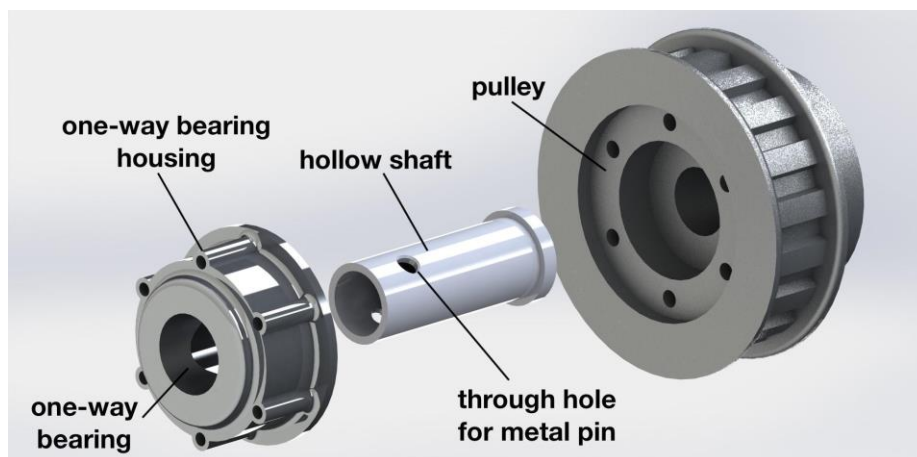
Custom one-way bearing assembly for parallel hybrid electric system.
